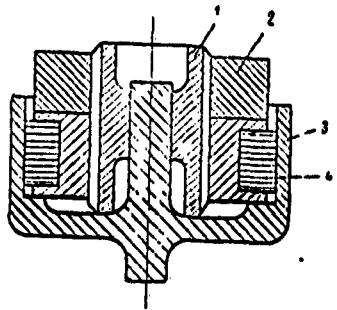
Fixture for pressing iron pack into rotor. 1) Sleeve; 2) false ring; 3) flywheel; 4) rotor iron pack with shunt winding.
